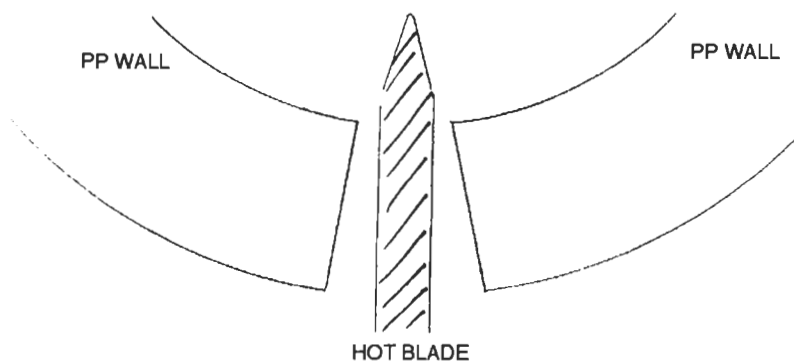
Weld formation in final closure of plastic panels to form large diameter hoop. The panels are bent round to meet a hot knife, the knife is withdrawn, and the two ends pressed together to form the final joint. One problem is that the panels are still in a state of strain, which is not relieved. Stress relaxation will occur with time, but residual stresses may contribute to early failures if the design itself is faulty.
